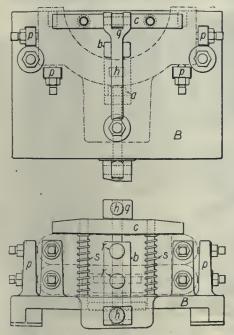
FIXTURE FOR MILLING CLAMPING SURFACES OF STRAPS.
